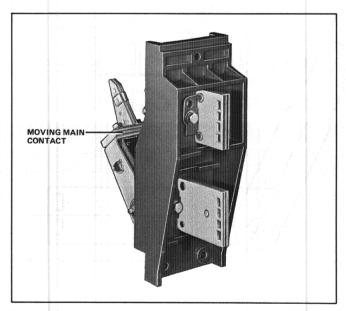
Type DS-416 Pole Unit Assembly - Rear View
